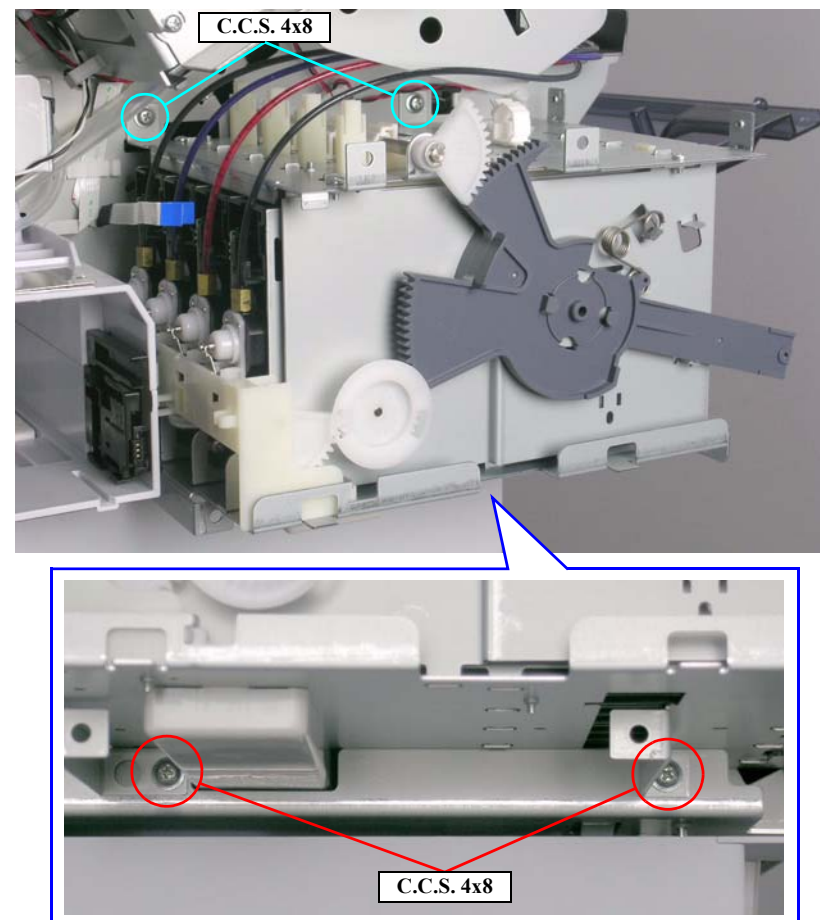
Screws Securing the HOLDER ASSY., IC, LEFT
